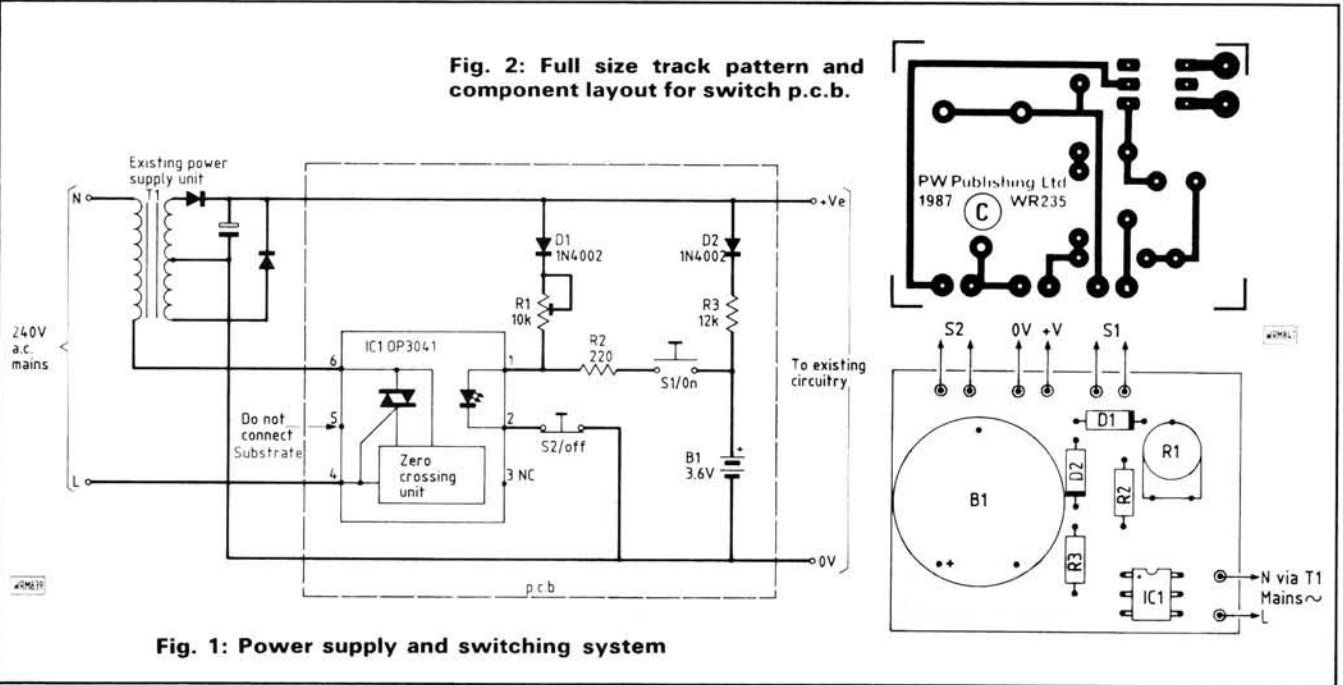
Full size track pattern and component layout for switch p.c.b.
